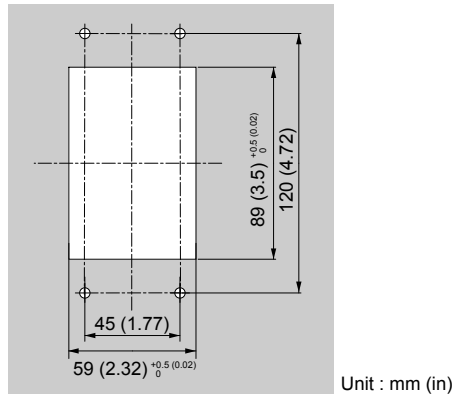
Panel Cut-Out Dimensions (Internal/Flush-Mount Installation)
